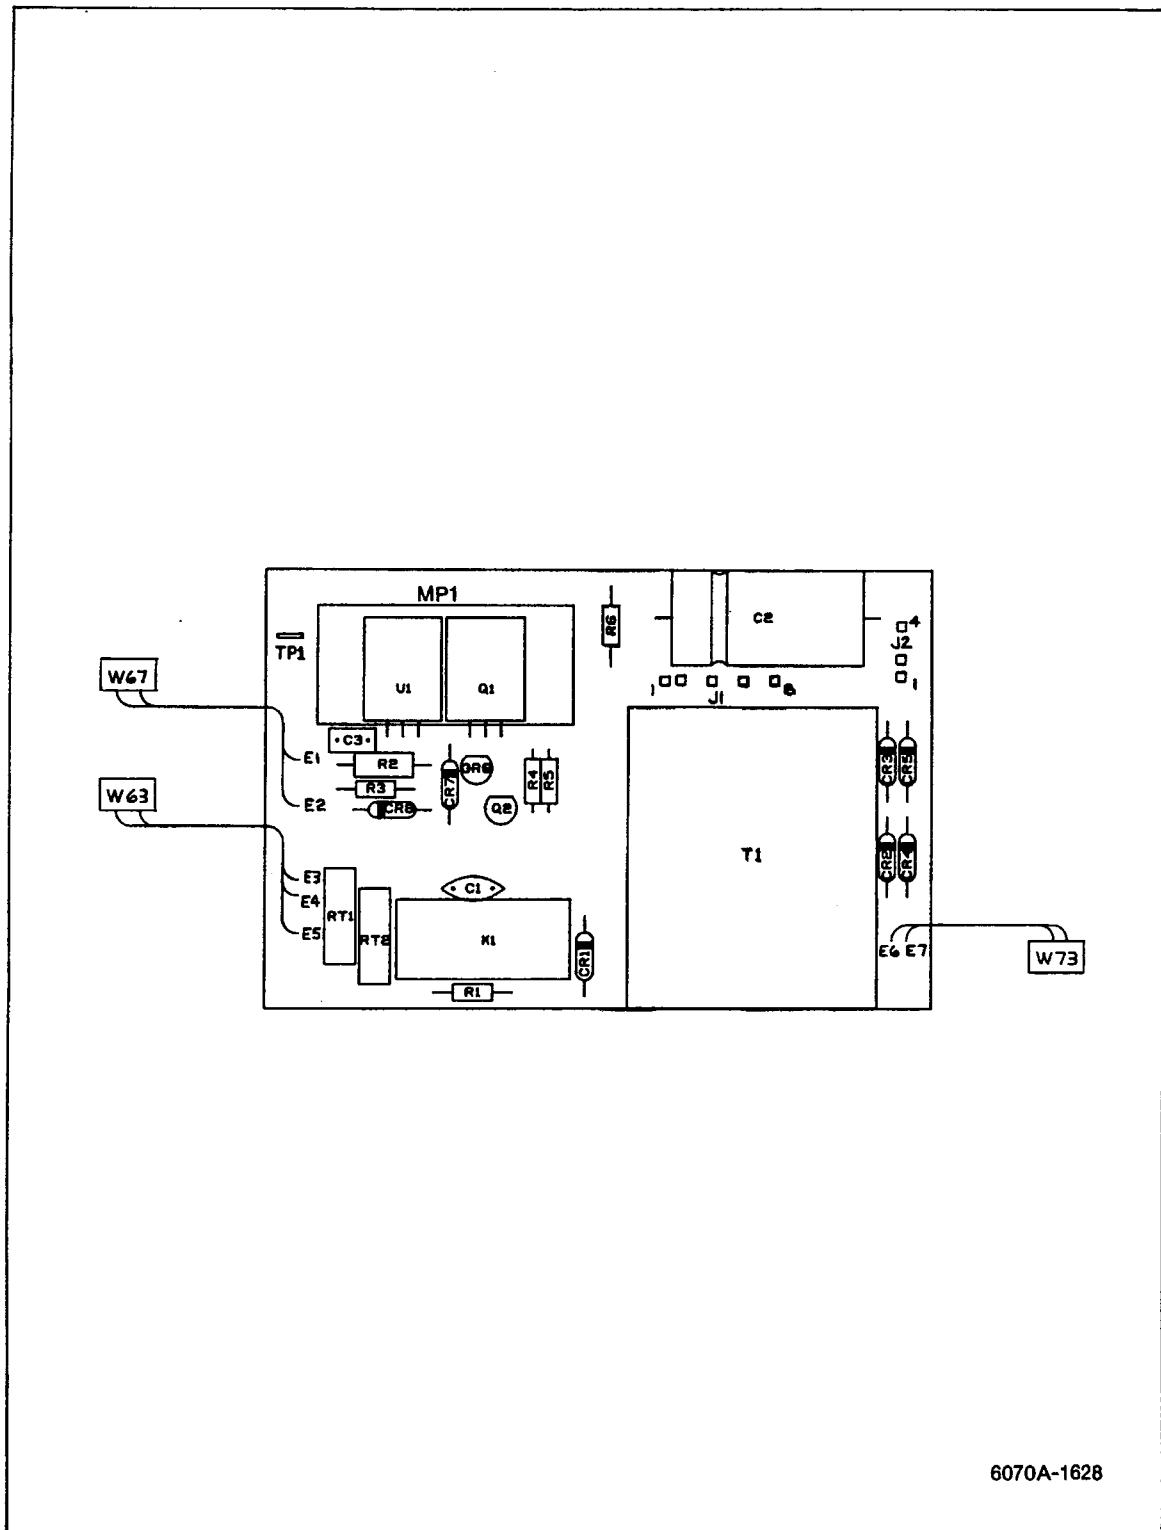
A5A3 Auxiliary Transformer PCB Assembly
